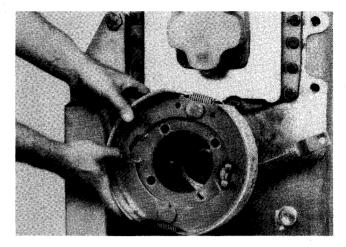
Install brake backing plate and brake band assembly on output bearing cap.
